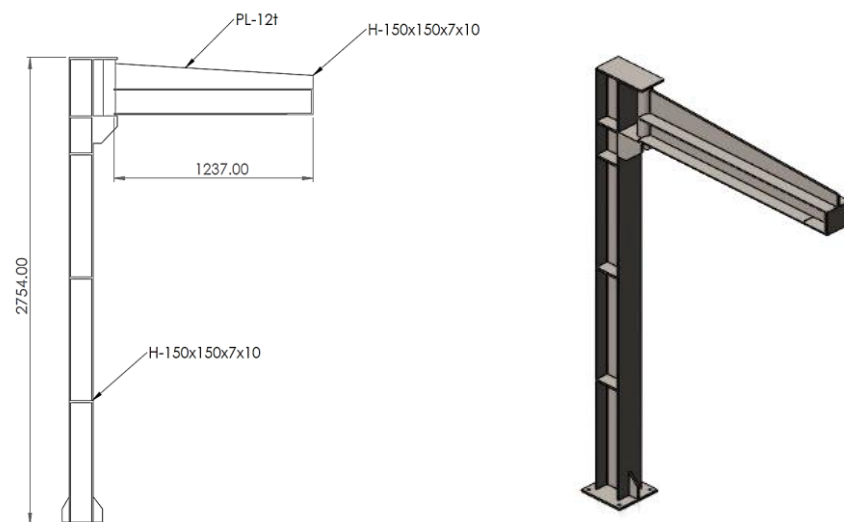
Type-1 Jib Crane; Swing arm beam H-beam 150×150×7×10 mm with a stiffener plate 12t mm.
